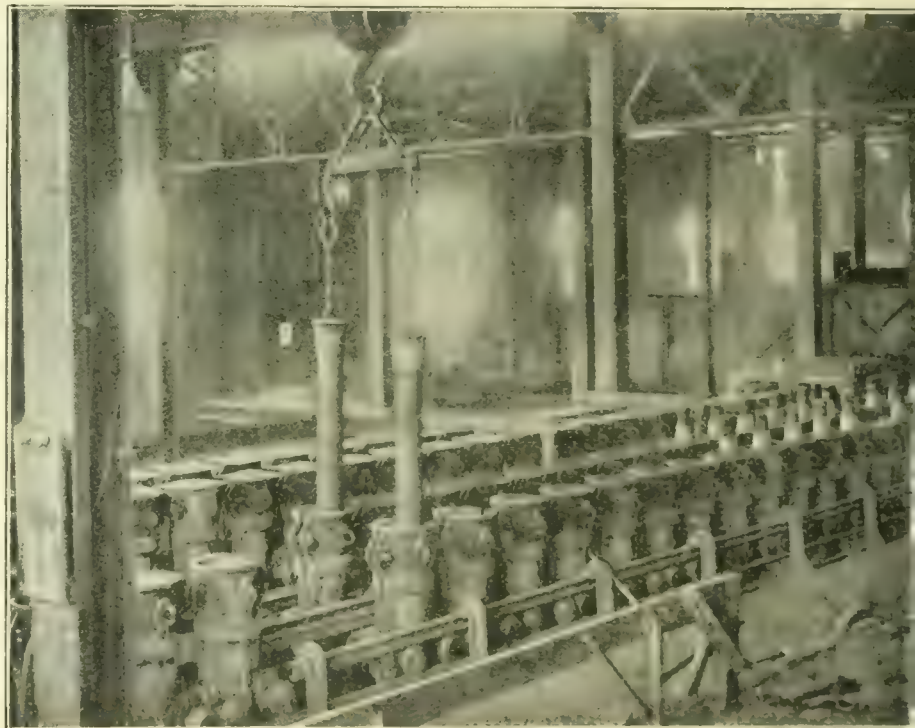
VIEW SHOWING METHOD OF REMOVING PIPES FROM THE FLASKS AFTER CASTING.
